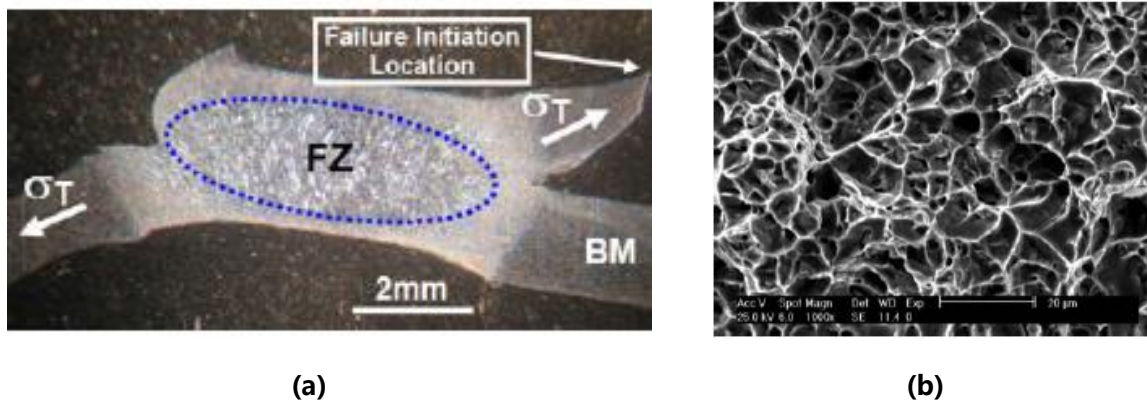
Cross-section surface of TS sample failed via PF (a) and fracture surface indicated by the arrow (b) in RSWs of low carbon steel [104].
